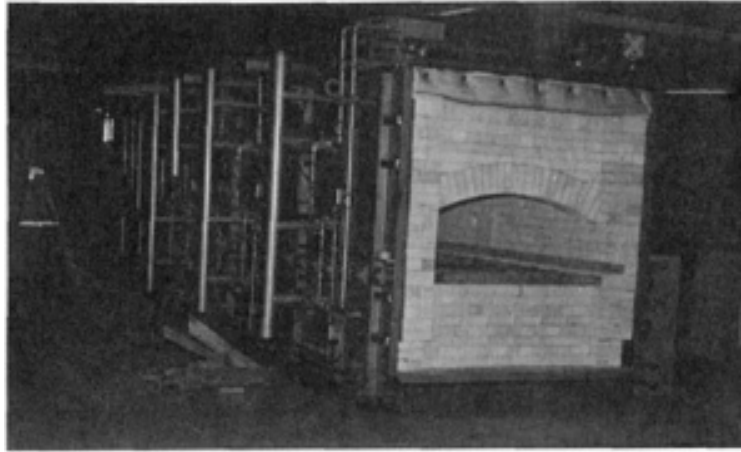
Section of a roller-hearth furnace. Courtesy of Seco/Warwick Corporation
